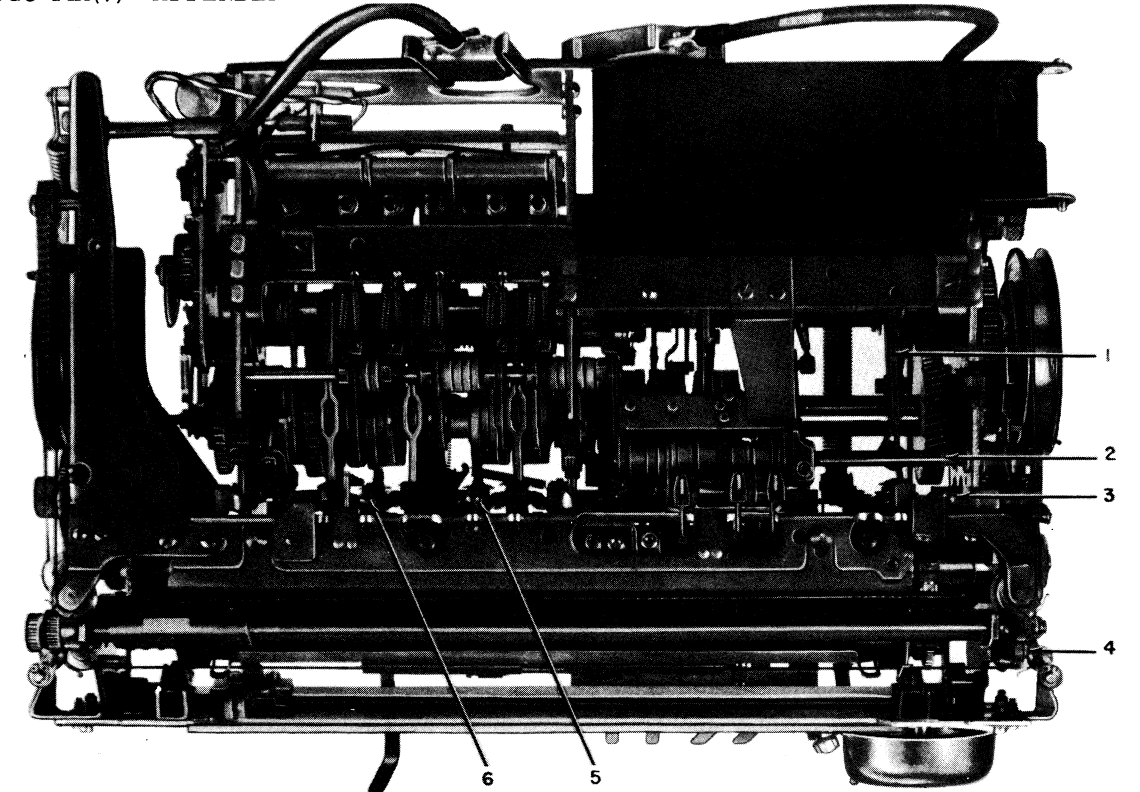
Top View of Printer, Ribbon Feed Mechanism Removed
